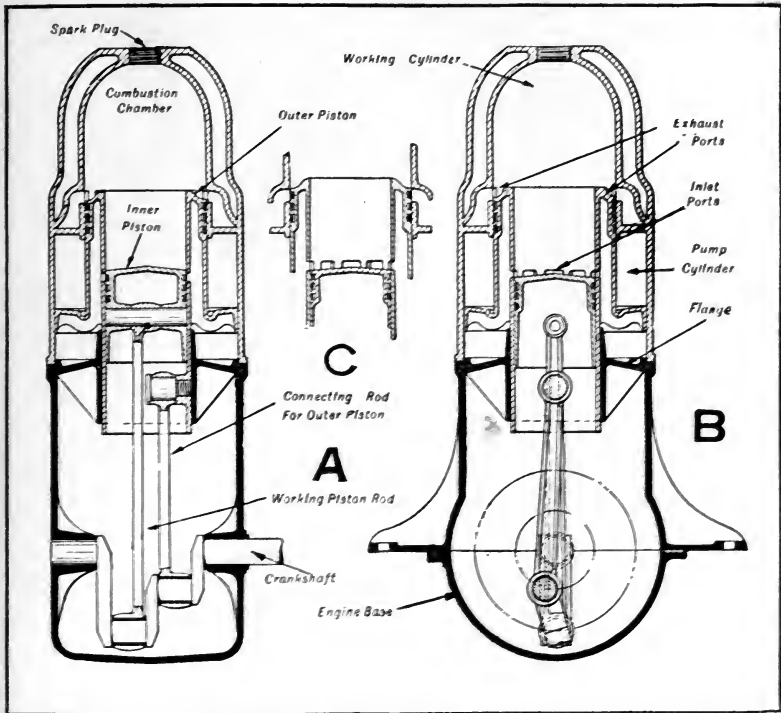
The Rayner (English) Two-Cycle Motor Employs Distinctive Double-Piston Arrangement. A—Side View Showing Crank Shaft and Connecting Rods. B—End Section Showing Relative Angularity of Connecting Rods. C—Inner Piston Uncovers Inlet Ports; Outer Piston Covers Exhaust Passages.
